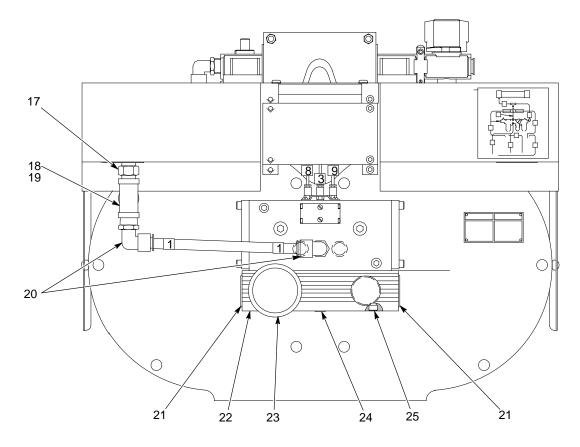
Miscellaneous Pump Parts (3 of 4)
